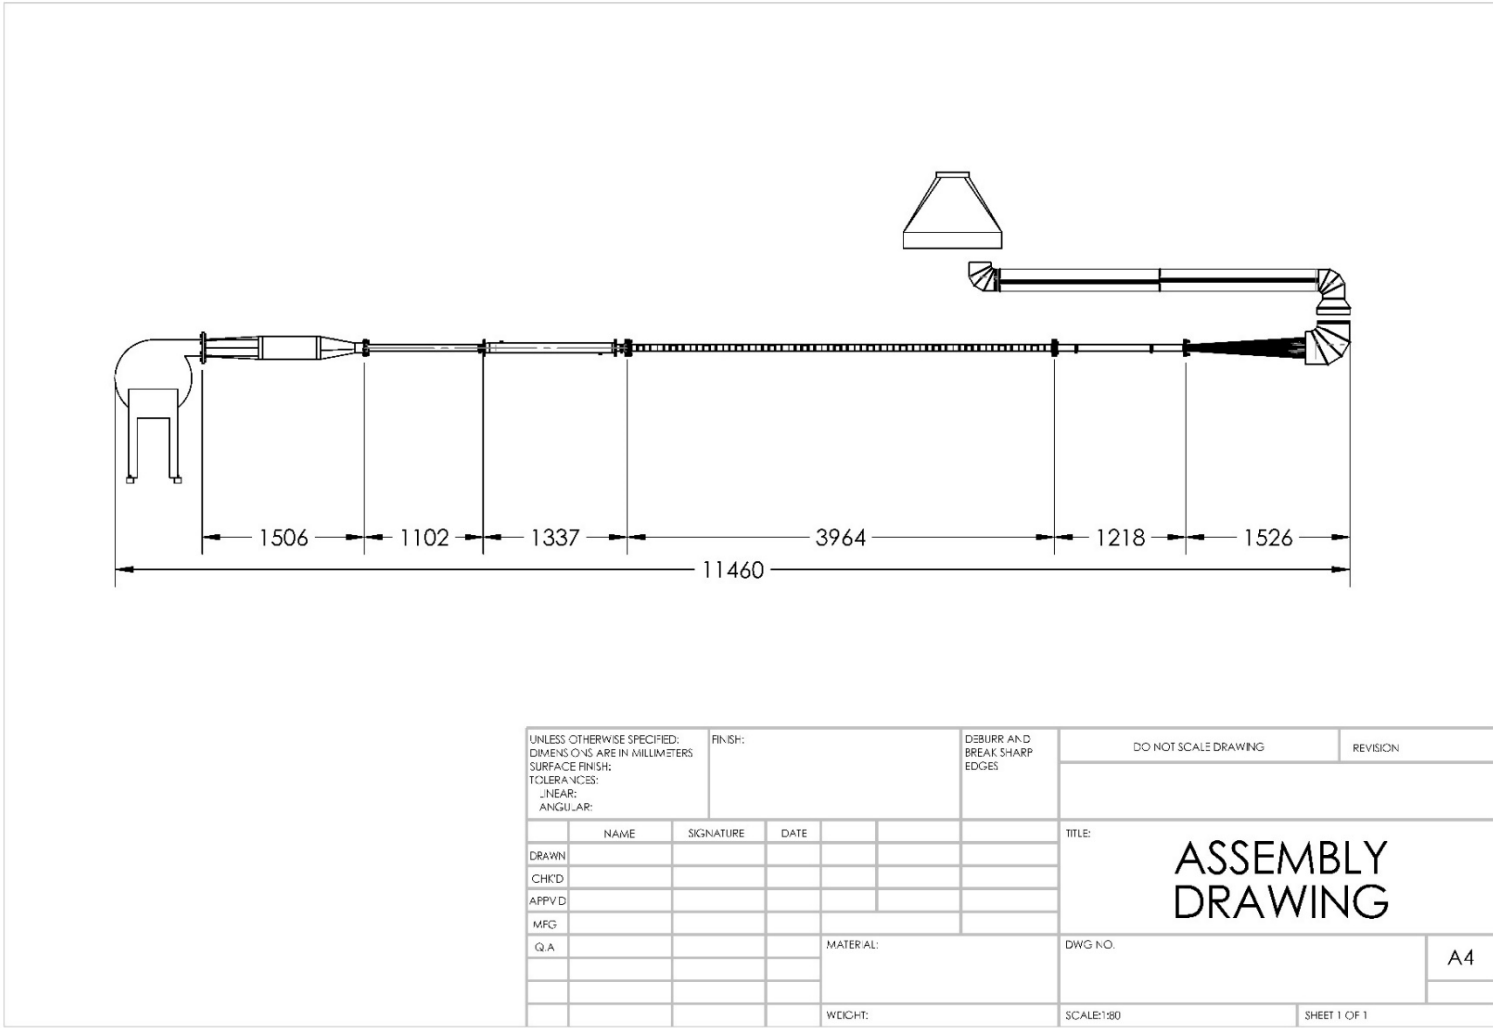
The front view drawing of the entire lab setup (dimensions are in mm).
